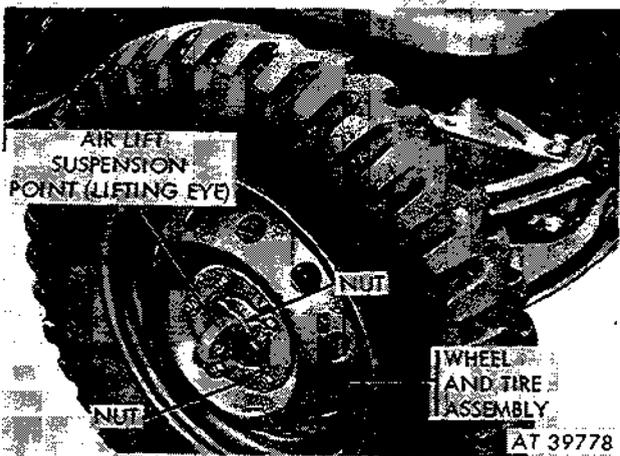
Remove nut and lifting eye, nuts, wheel and tire assembly.
